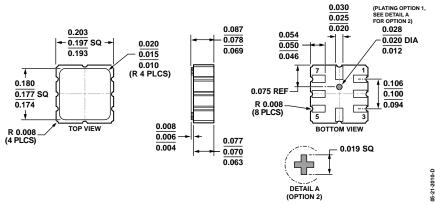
8-Terminal Ceramic Leadless Chip Carrier [LCC] (E-8-1) Dimensions shown in inches
